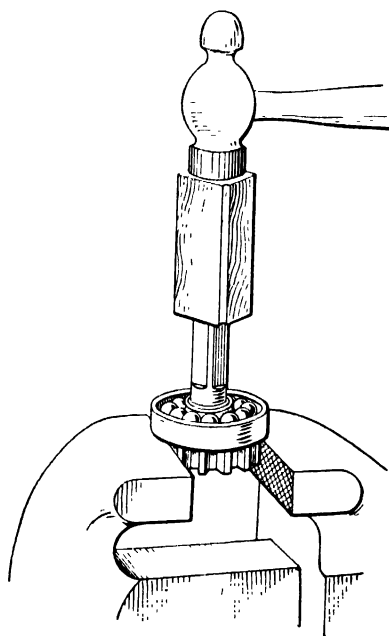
Removing Bearing from Main Shaft Clutch Gear.
